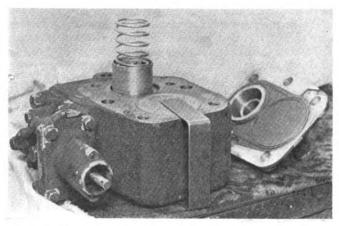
U-clamp for holding by-pass check valves, springs, seat and stop in place while applying the service-valve cover
